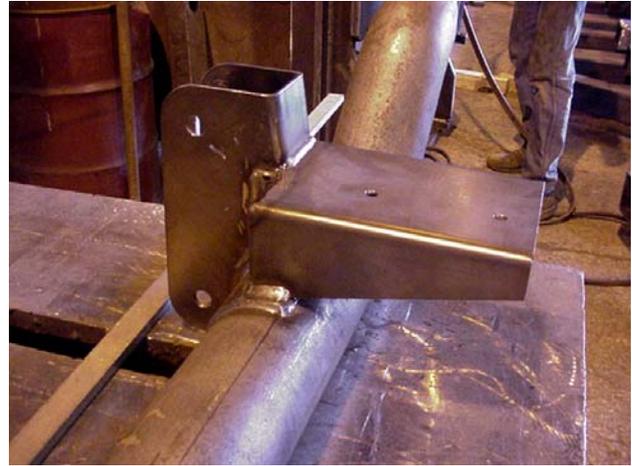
Steel interface-bracket assembly on subplate welded to tube.
